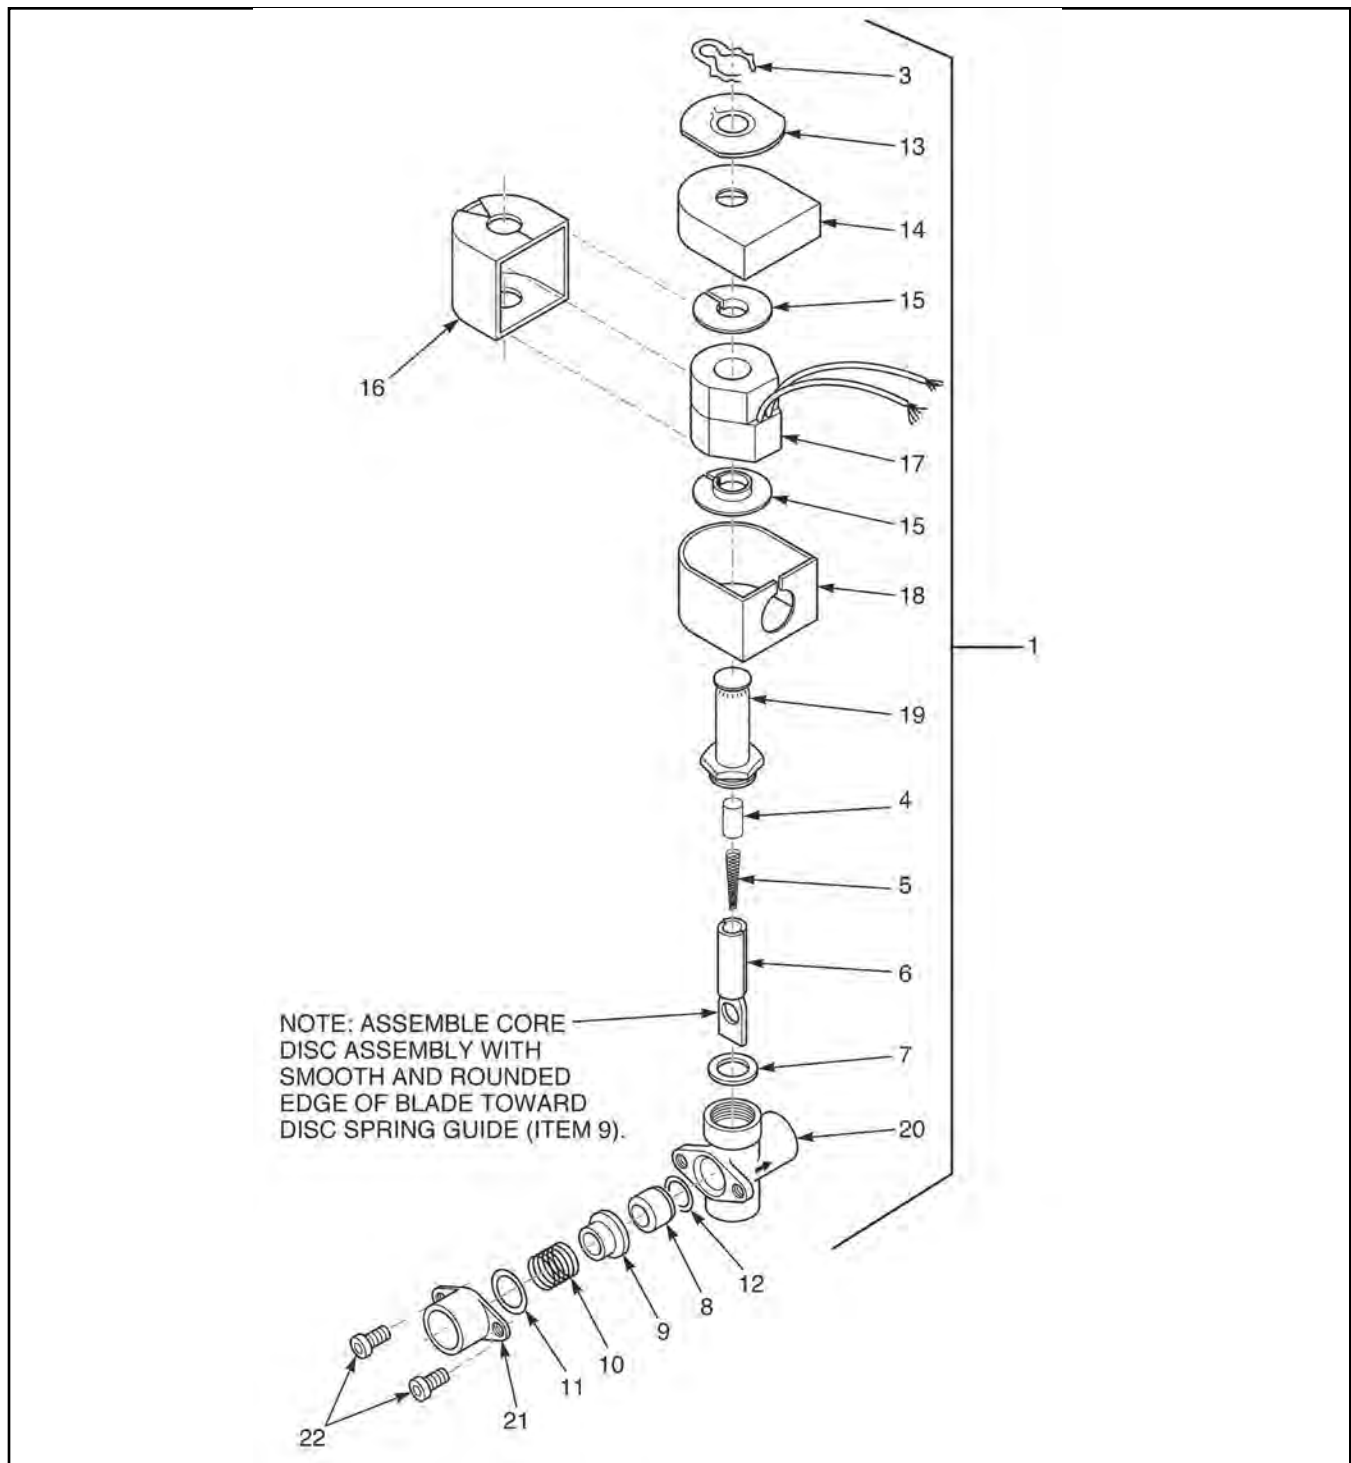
Solenoid Valve Assembly (Gas or Electric Model)
